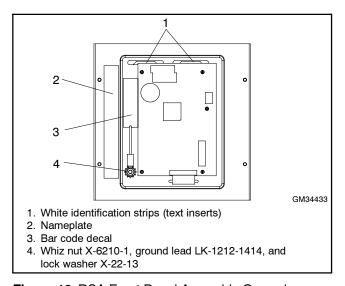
RSA Front Panel Assembly Ground Connection (Back View)
